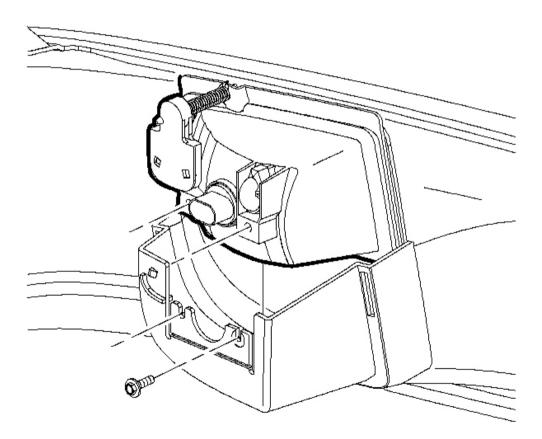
View Of Front Fog Lamp Courtesy of GENERAL MOTORS CORP.
